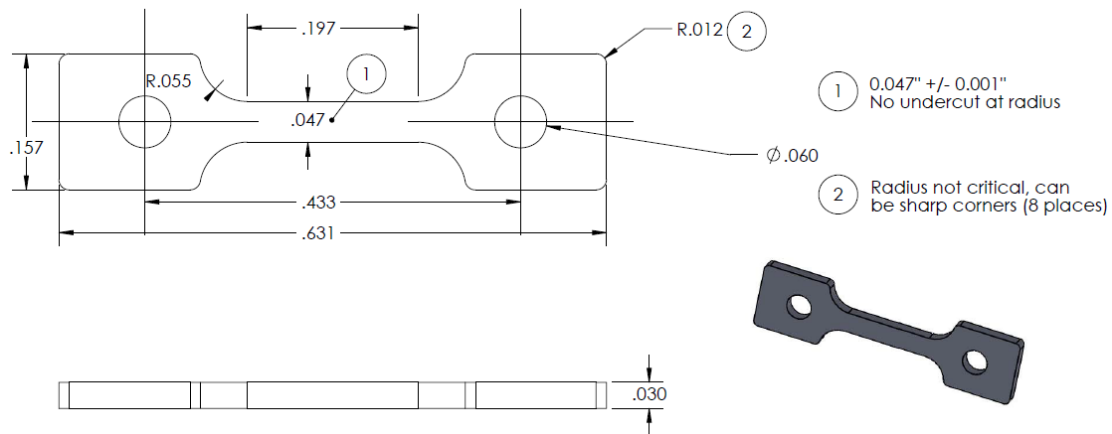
Schematic of miniature tension test samples with dimensions. The samples were cut using EDM.
